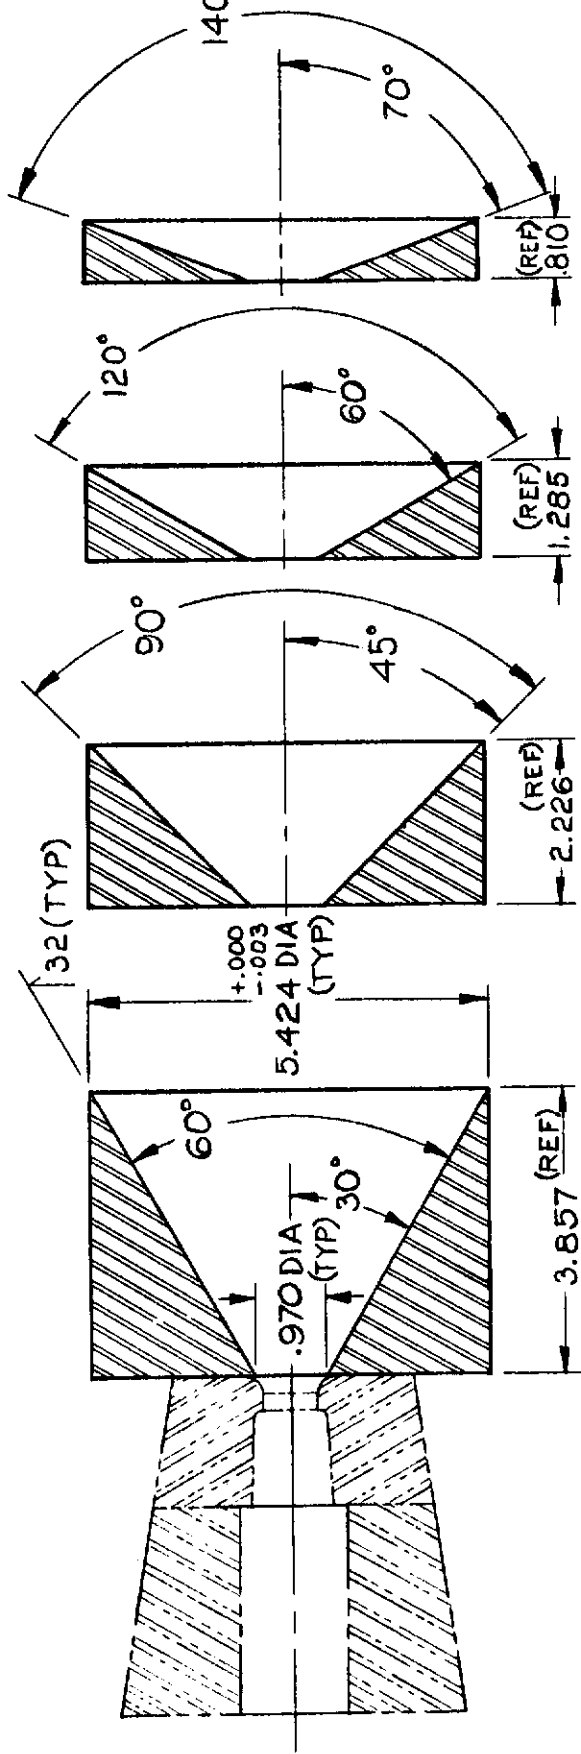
THE BERYLLIUM CORP. DRAWING OF FOUR EXPERIMENTAL BERYLLIUM EXTRUSION CONE LEADINS WITH EXTRUSION DIE BACKER.
